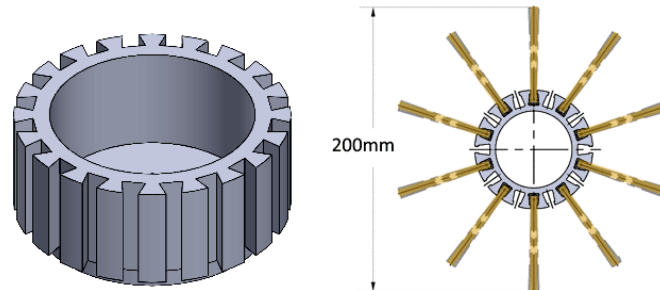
CAD drawing of the hub (left). Cross section of the hub with brushes (right).
